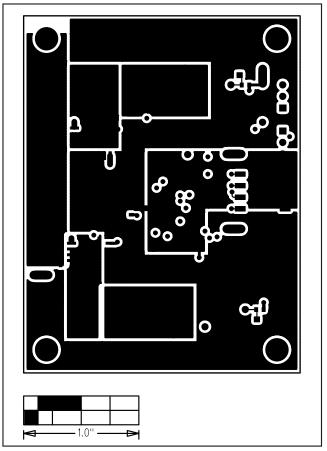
MAX17020 EV Kit PCB Layout—Component Side
